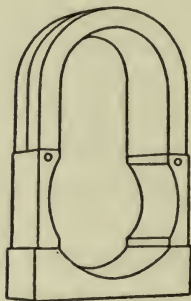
A.—THE PARTS OF THE REMY INDUCTOR
